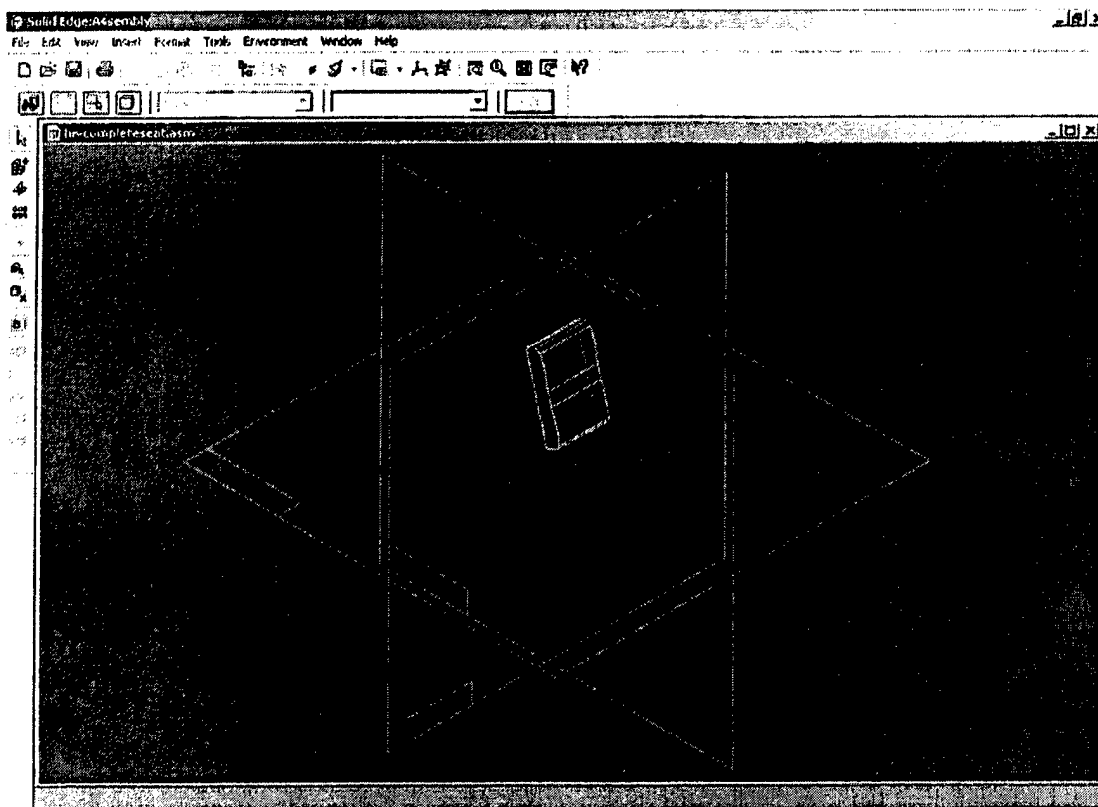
View of the seat back after deleting all other parts of the seat assembly
